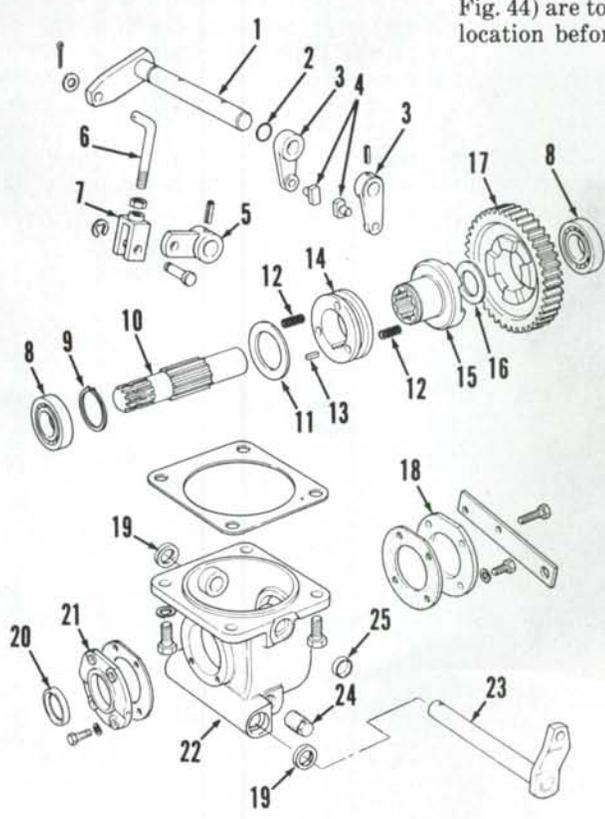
Exploded view of transfer gearbox used on models with powershift transmission and Carraro front drive axle. Note that selector linkage is slightly different on 1594 models.
